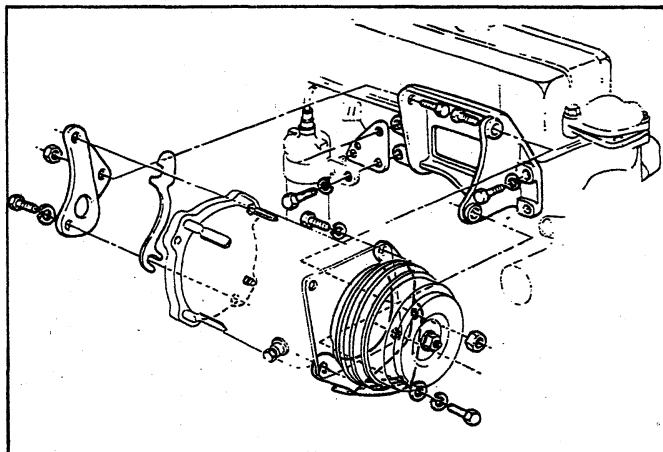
Compressor Mount—L-6 Engines (Typical)
